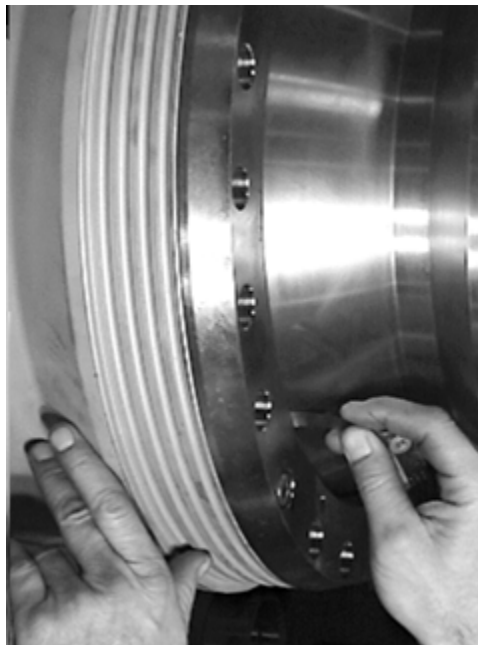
Use Feeler Gauge and Obtain Zero Clearance Between Ball and Retainer
